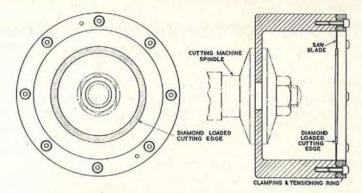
MOUNTING DETAILS FOR ANNULAR SAW.
